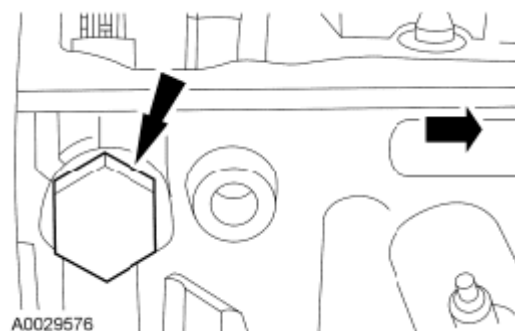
Locating RH Hydraulic Timing Chain Tensioner
